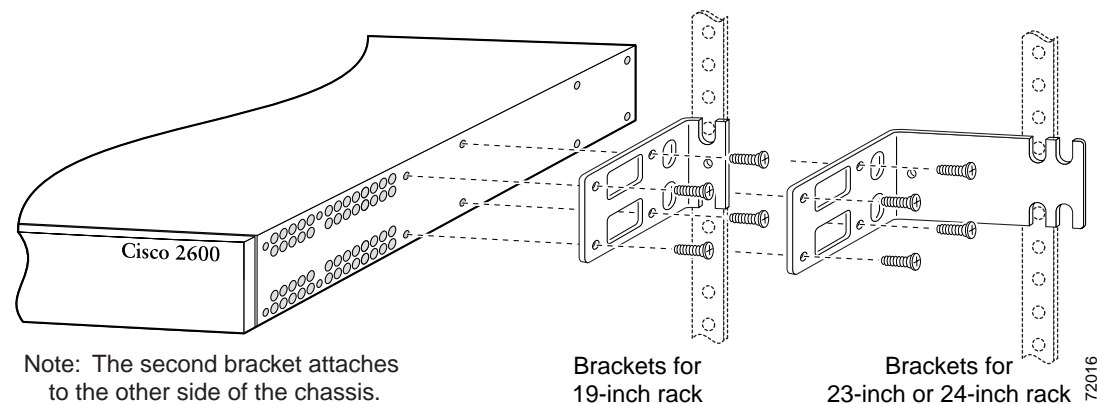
Center-Mount Bracket Installation—Rear Panel Forward (19-Inch Rack with a 17.75-Inch Opening or a 23- or 24-Inch Rack)
